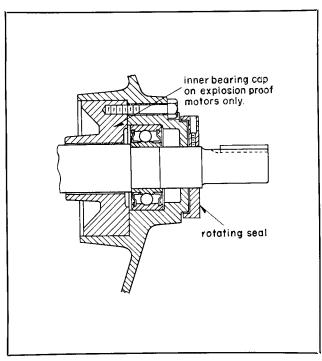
Sectional View—Prelubricated Ball Bearing Assembly
